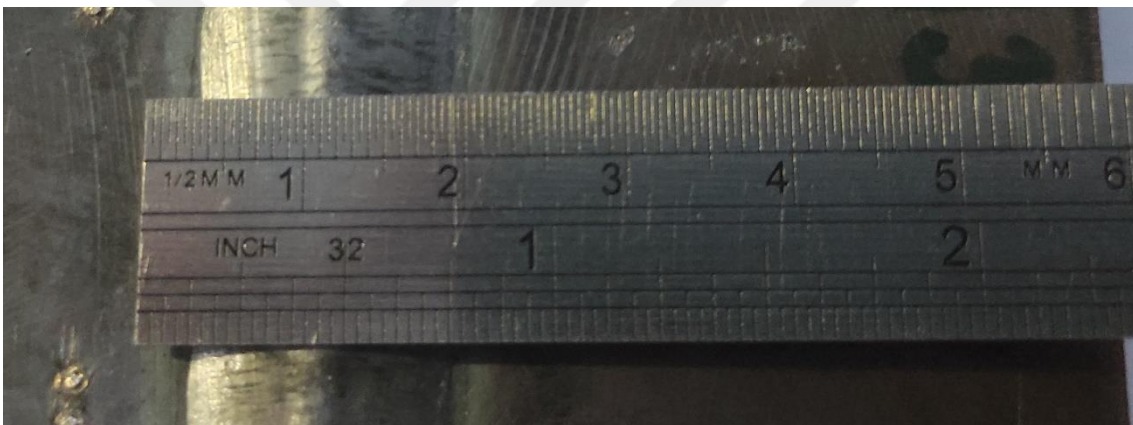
Goldak's double elipsoidal parameters view on test plate
